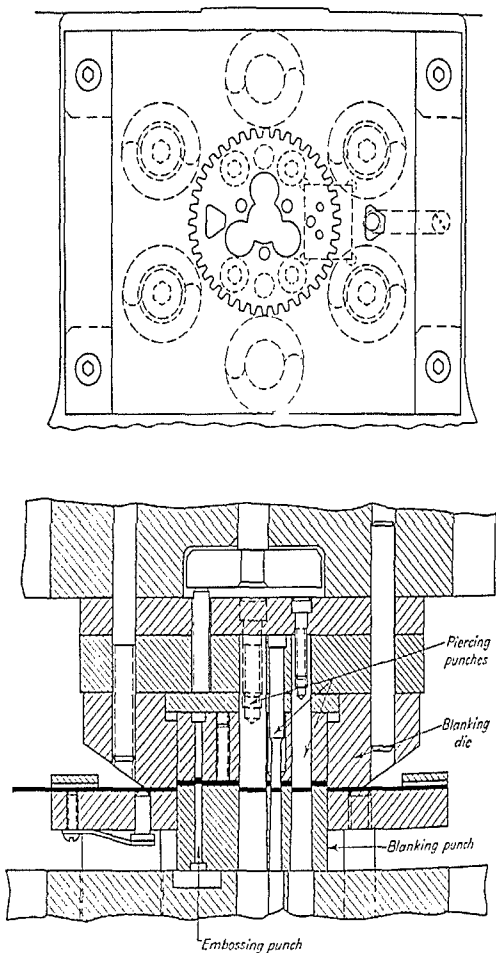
Combination die for blanking and piercing gear and extruding projections on the surface. (Barth Corp.)
